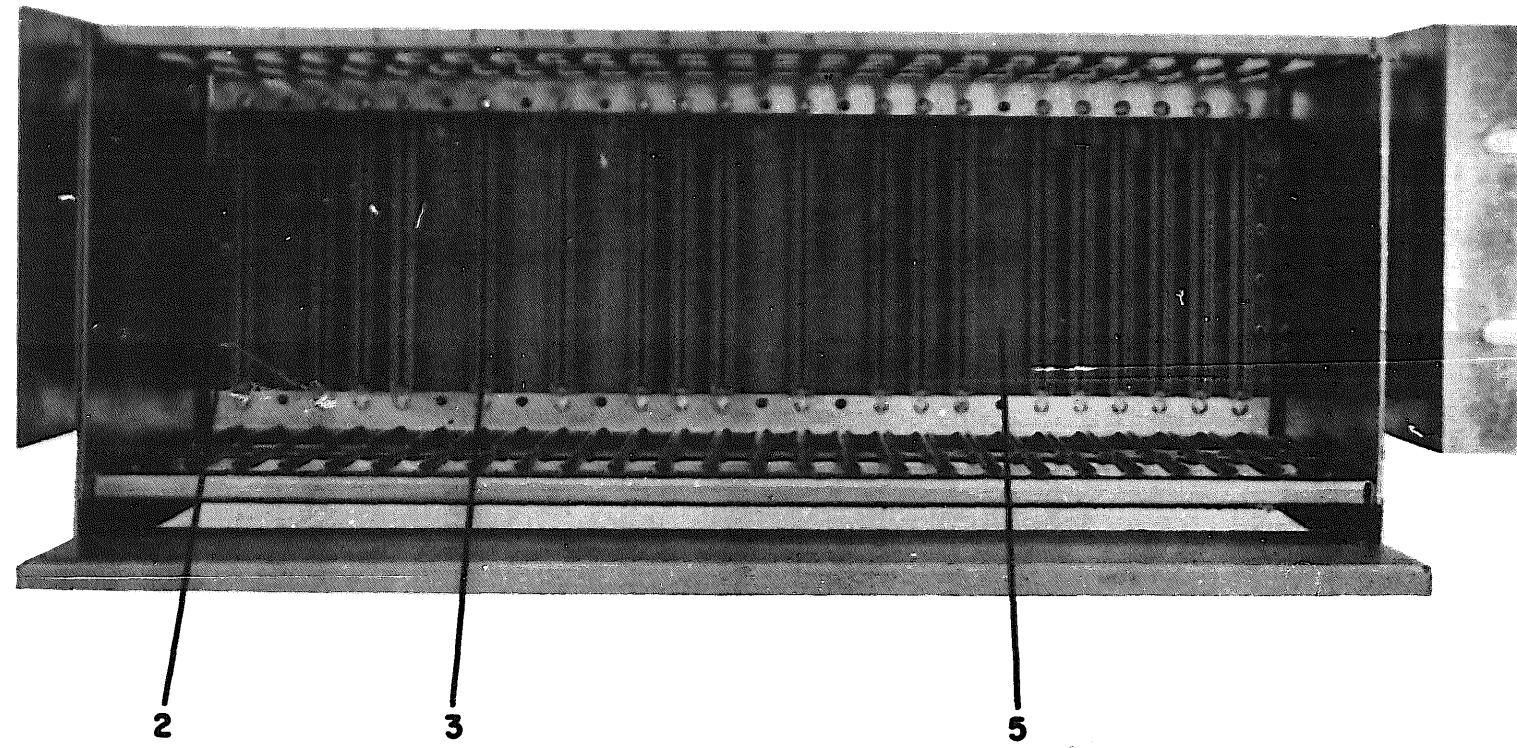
Connector Assembly, Electric (Sheet 2 of 2)
